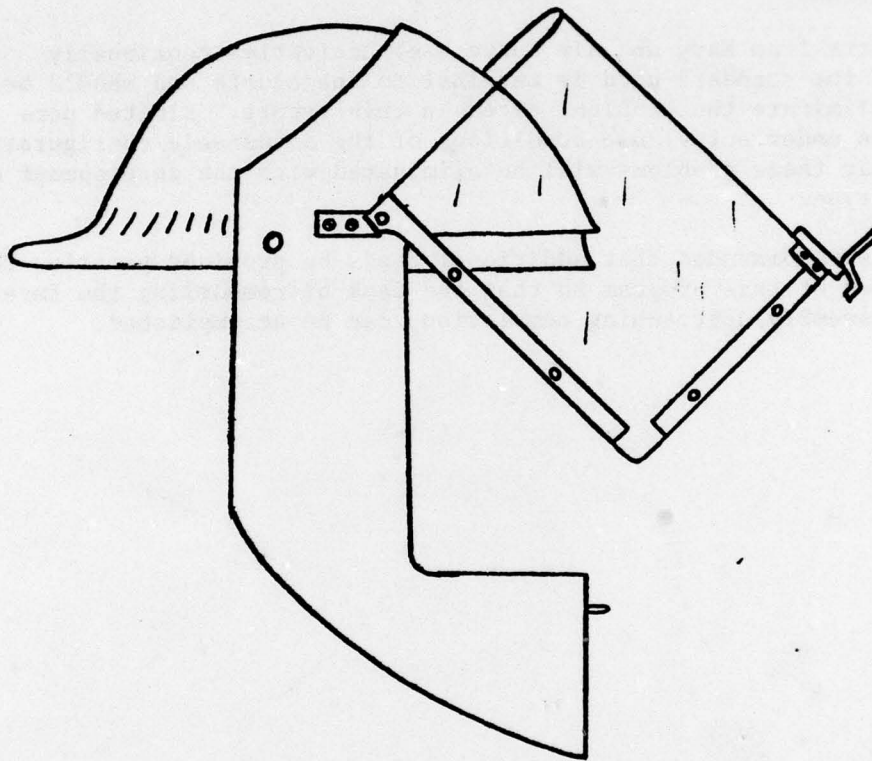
Inner Components of Adjustable Facepiece Visor Assembly.
